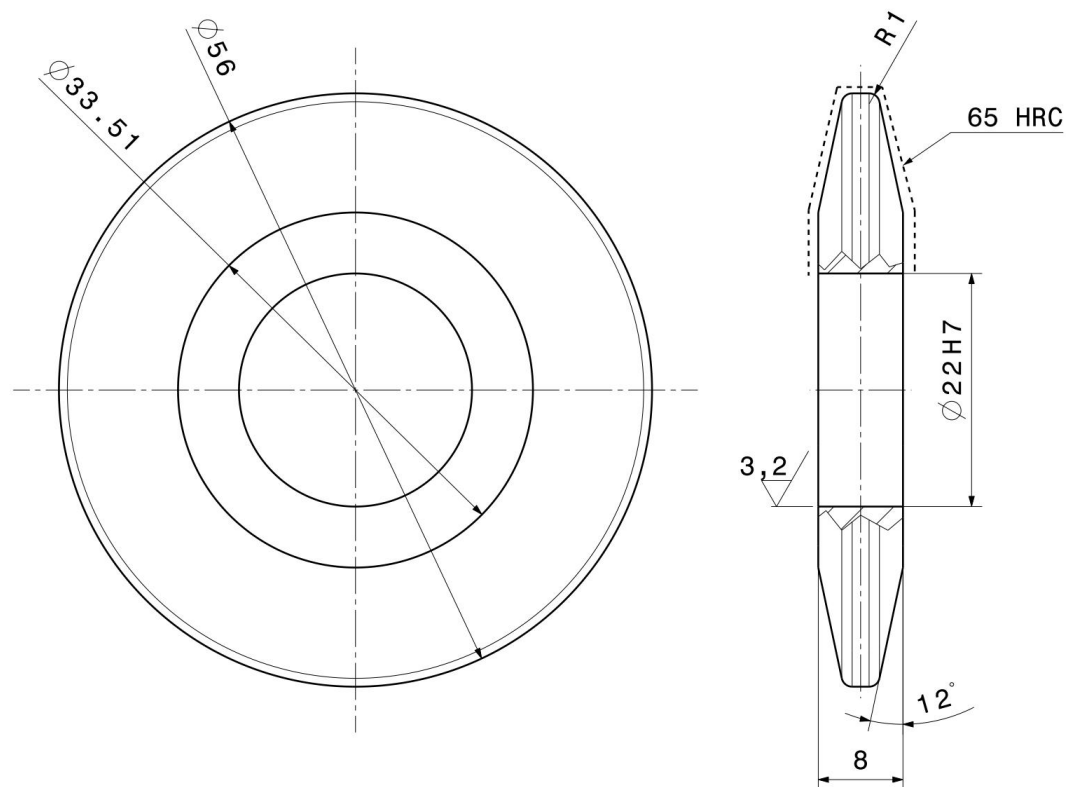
Geometry of the disc cutter (dimensions in mm)
